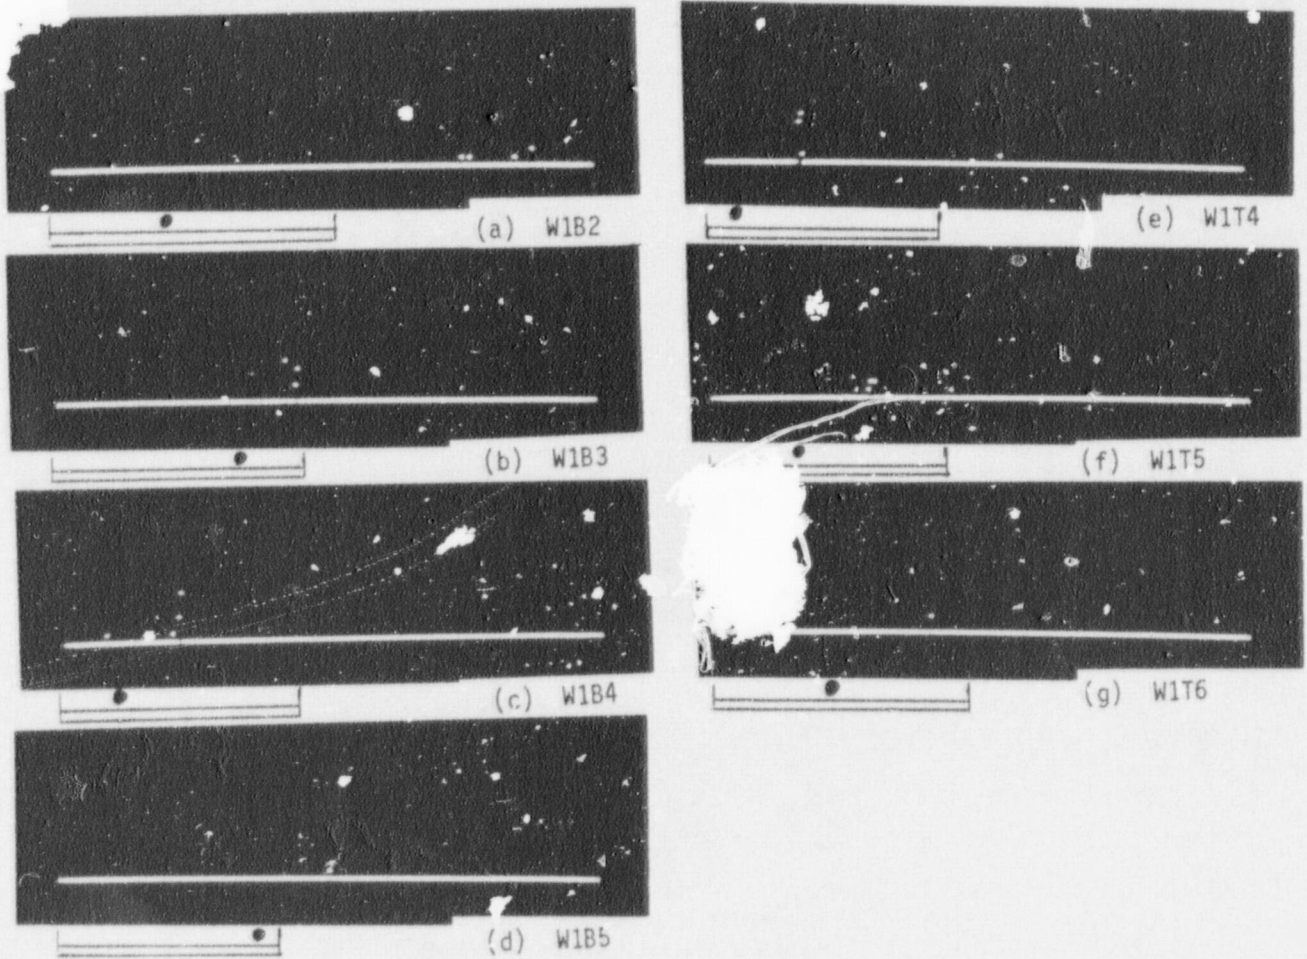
DETECTION OF 0.5" CRACKS DURING SUBMERGED ARC WELDING OF A533B PRESSURE VESSEL STEEL
